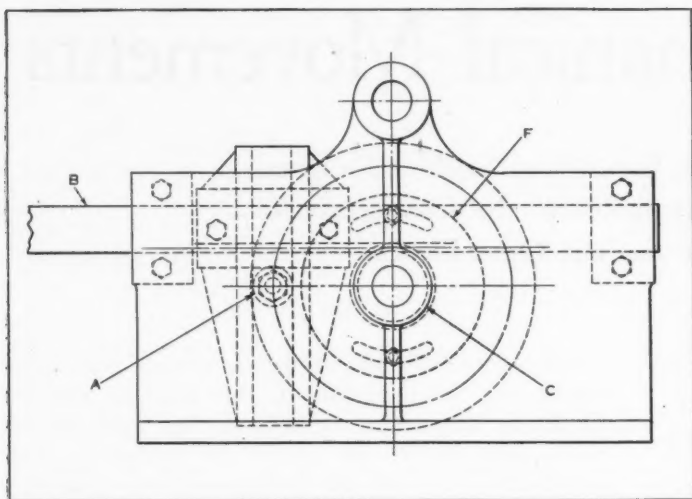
End View of Mechanism Illustrated in Fig. 1
